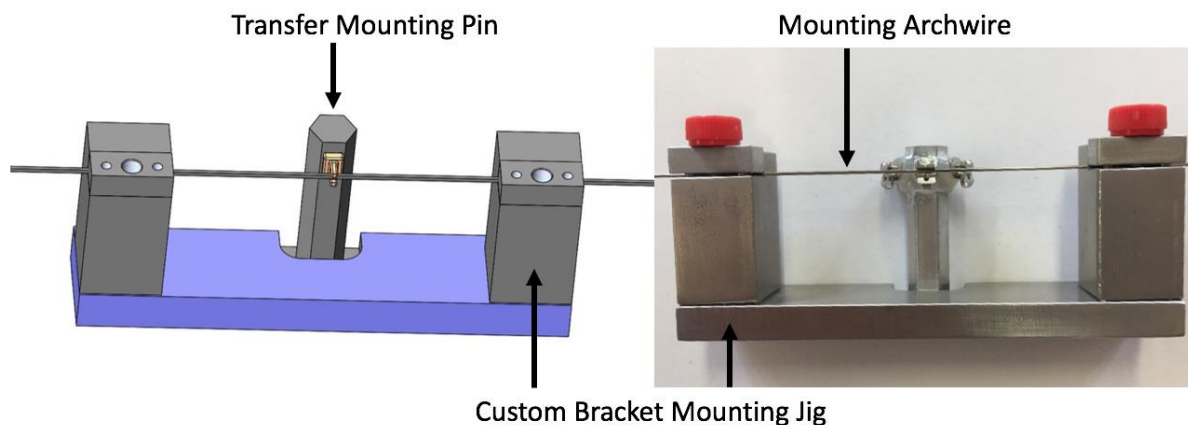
Custom fabricated bracket mounting jig with fixed mounting archwire and removable transfer bracket mounting pin.
